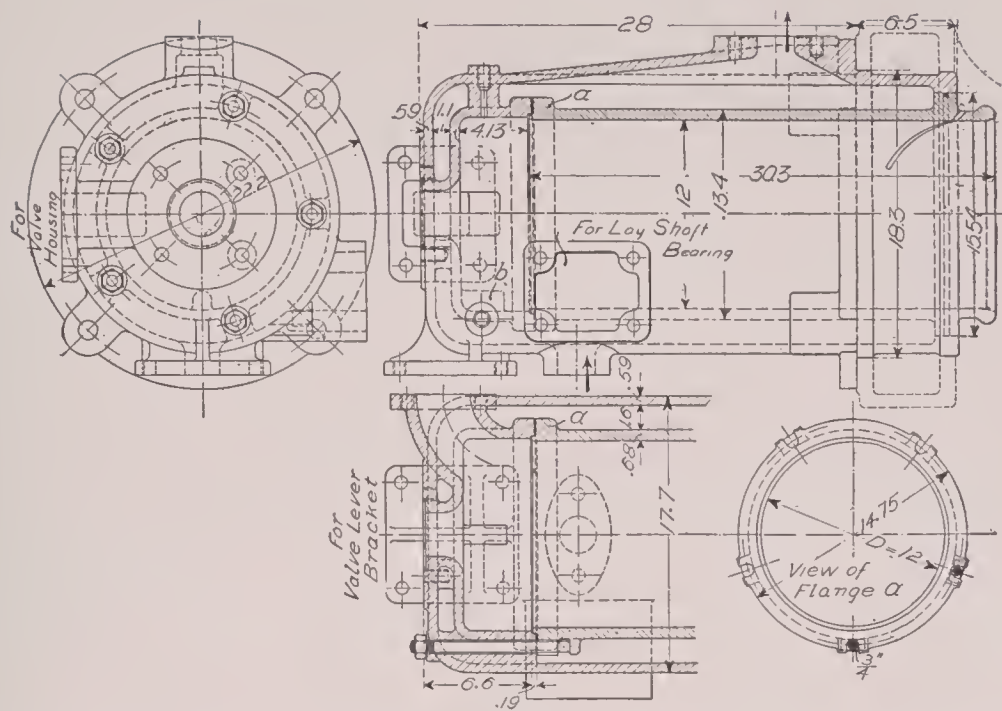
Cylinder for a 60 H.P. Engine, Langen & Wolf, Vienna. (Cylinder head in one piece with liner.)
